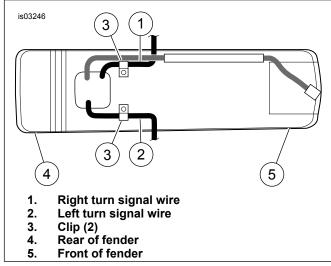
Turn Signal Wires and Clips (Viewed from Bottom Inside Rear Fender)
